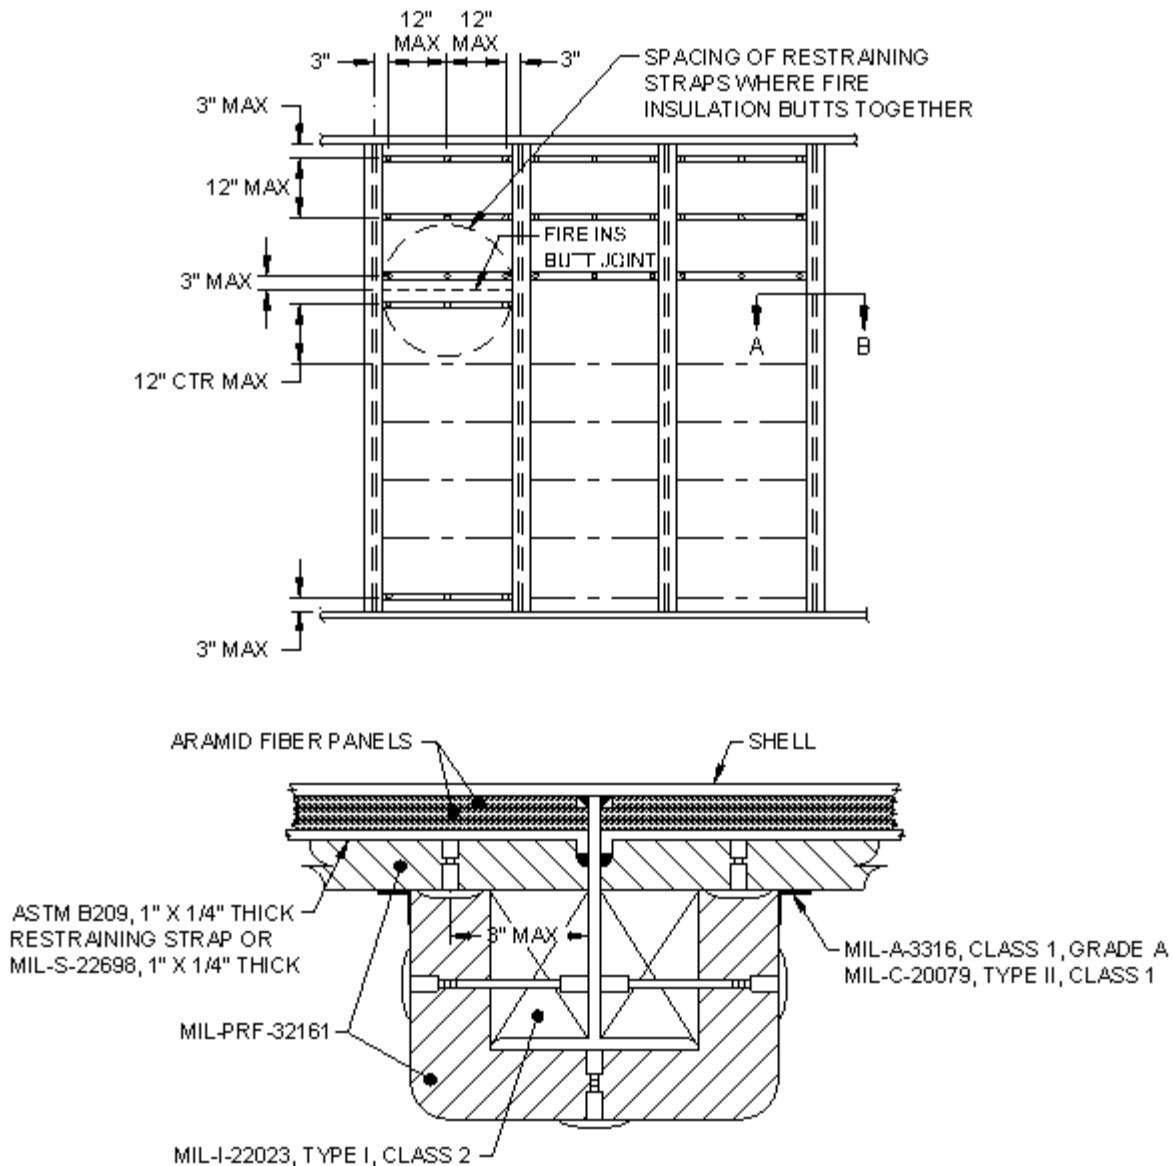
Typical installation of aramid fiber panel restraining strap showing fire insulation stud arrangement on bulkhead with vertical stiffeners (fire insulation removed for clarity).
